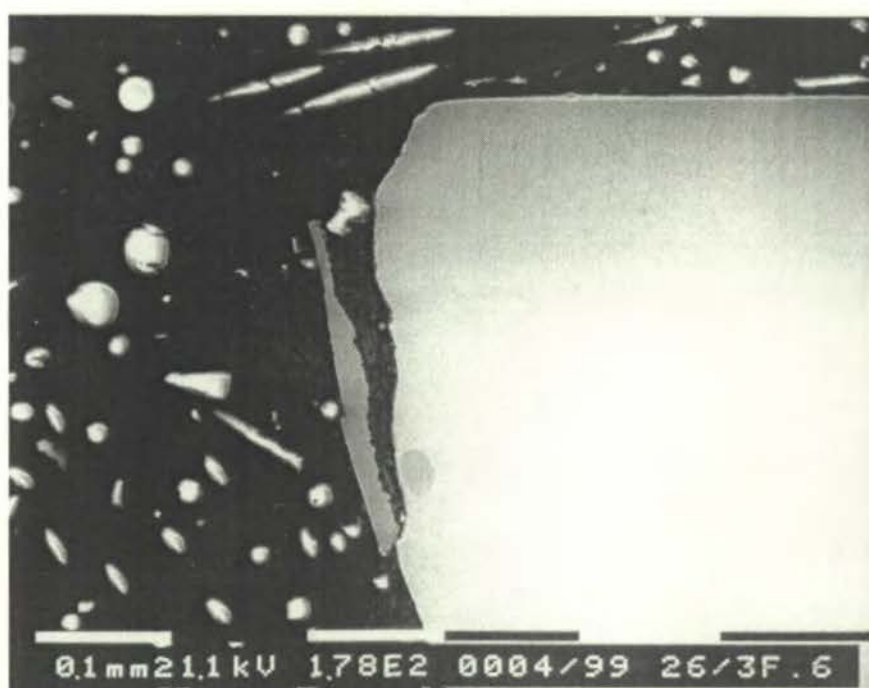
22 Sectioned KMF tool showing workpiece adhesion over the chipped and plucked flank face after cutting Waspaloy for 2 minutes at 25 m/min and 0.14 mm/tooth.
